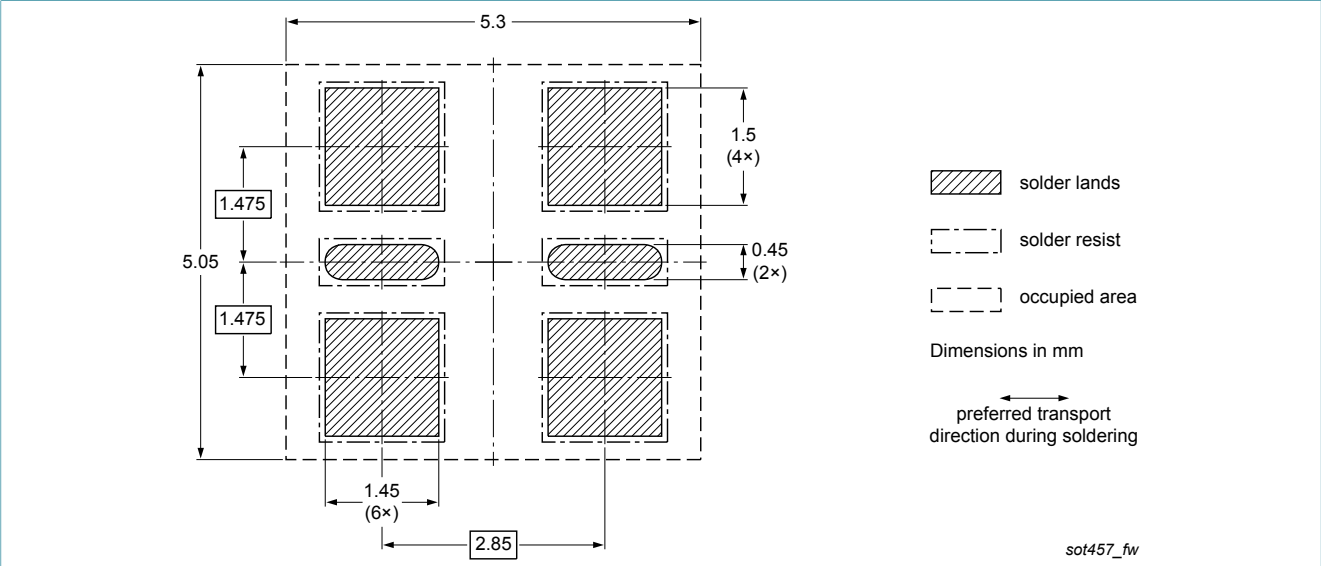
Wave soldering footprint for TSOP6 (SOT457)
